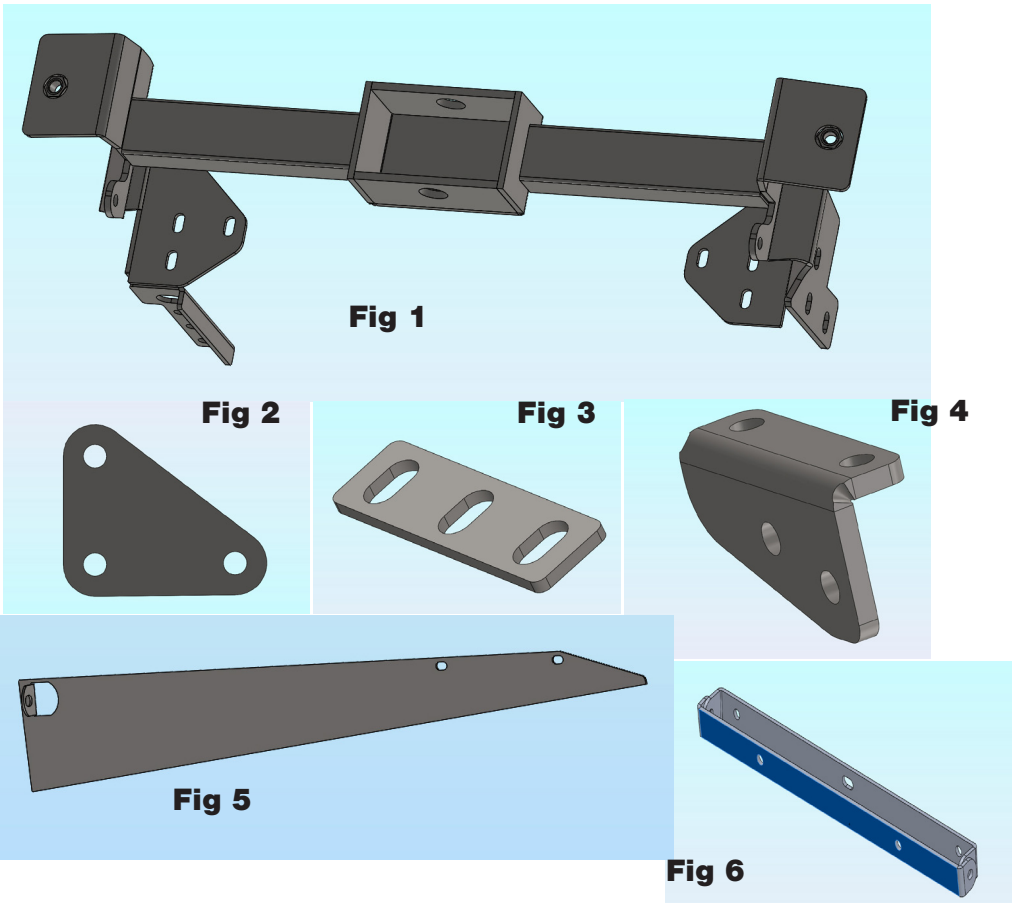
2 x 3 hole chassis mount washer plate (B3HN00321SY_A4MS) - In bolt kit
